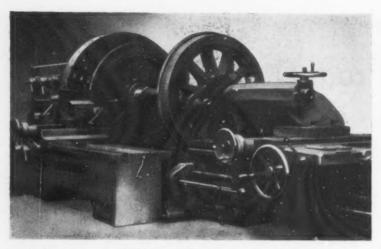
Set-up for Machining Railway Wheels with the Auxiliary Bed on the Granor Lathe
